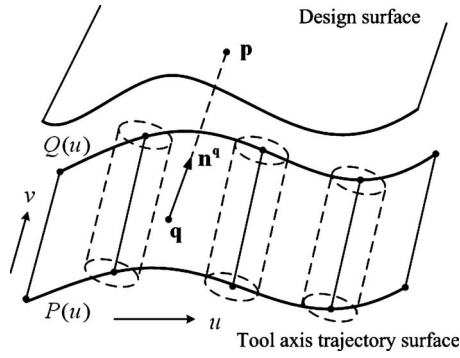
Tool axis trajectory surface represented as a ruled surface
